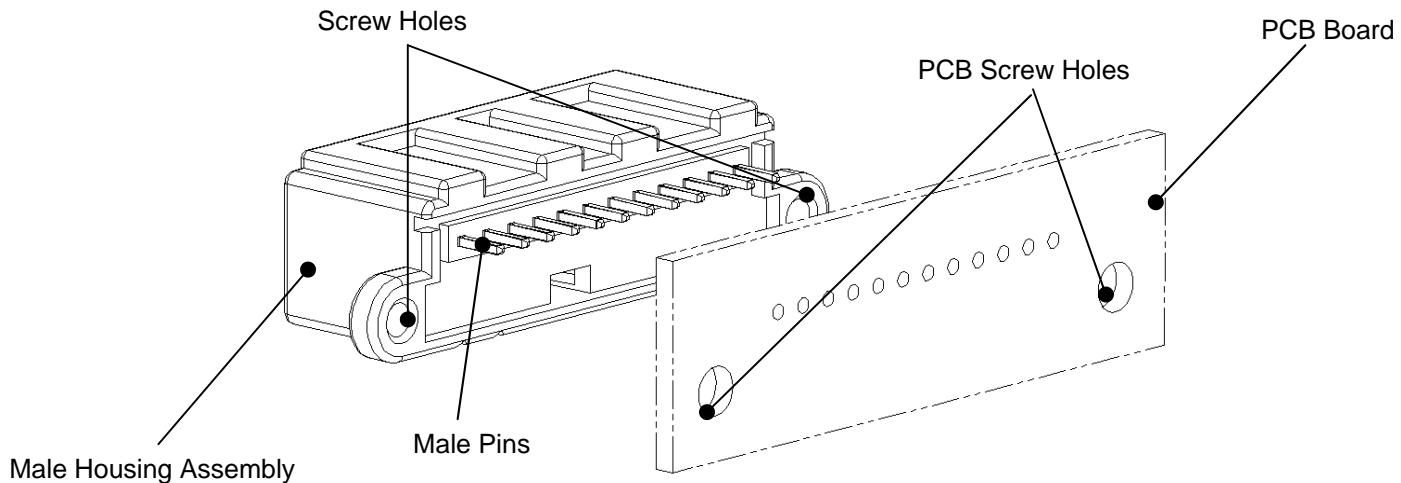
Polarization of the Male Assembly with the PCB Board (e.g. 12 positions)
